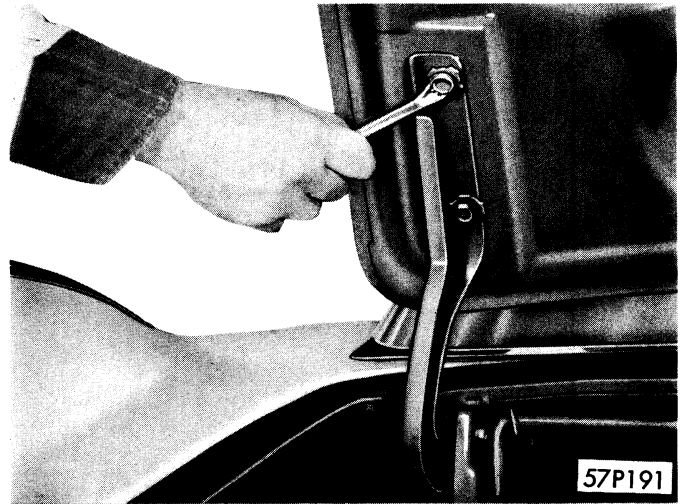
Loosen Deck Lid-to-Hinge Attaching Screws
